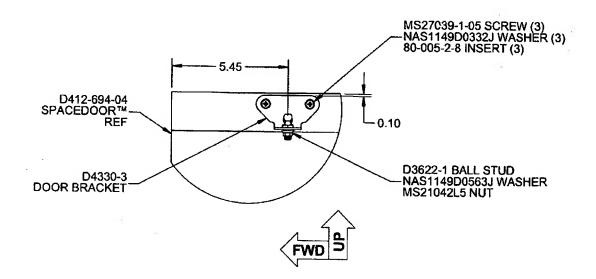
LOCATION OF D4330-3 DOOR BRACKET (SPACEDOOR TM) (RH Shown, LH Opposite)
